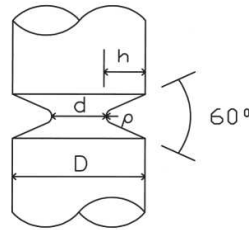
Gage section of the cylindrical specimen with a circumferential V-notch.[1]
